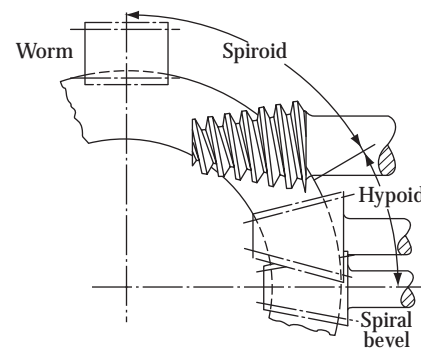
Schematic comparison of worm gears, Spiroid gears, Helicon gears, hypoid gears, and spiral bevel gears.
